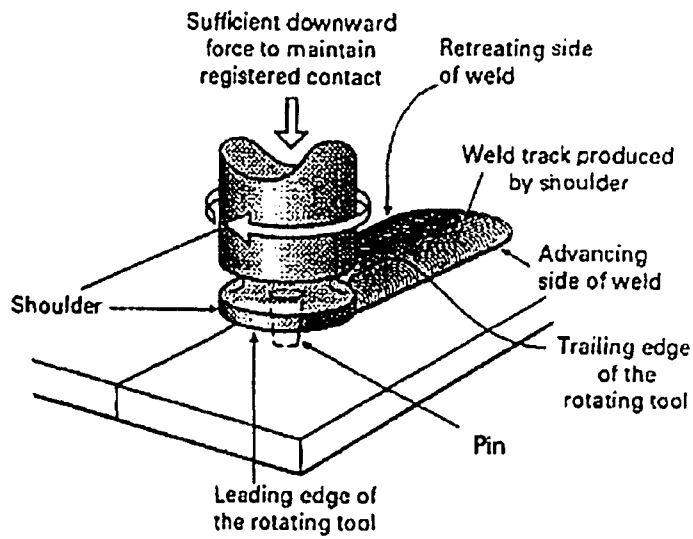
1 Illustration of the FSW process for butt joint welding².
